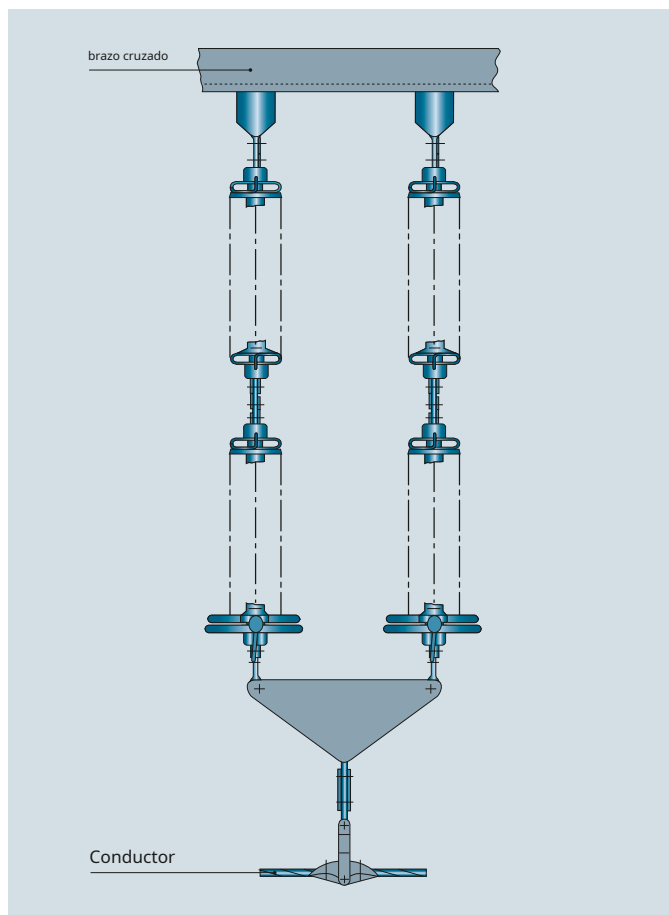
I-shaped suspension insulator set for 245 kV
